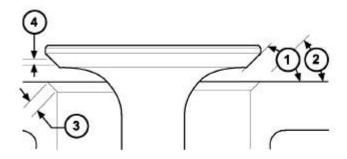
Inspecting Valve Margin Courtesy of CHRYSLER GROUP, LLC
